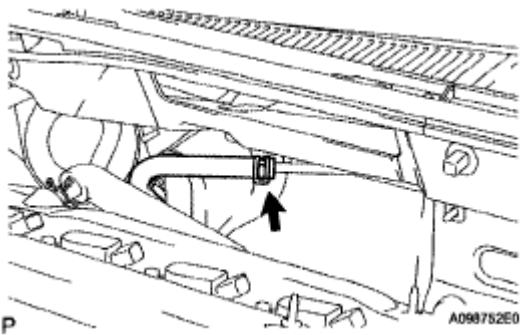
Locating Connector Tube Hose From Booster Vacuum Tube
